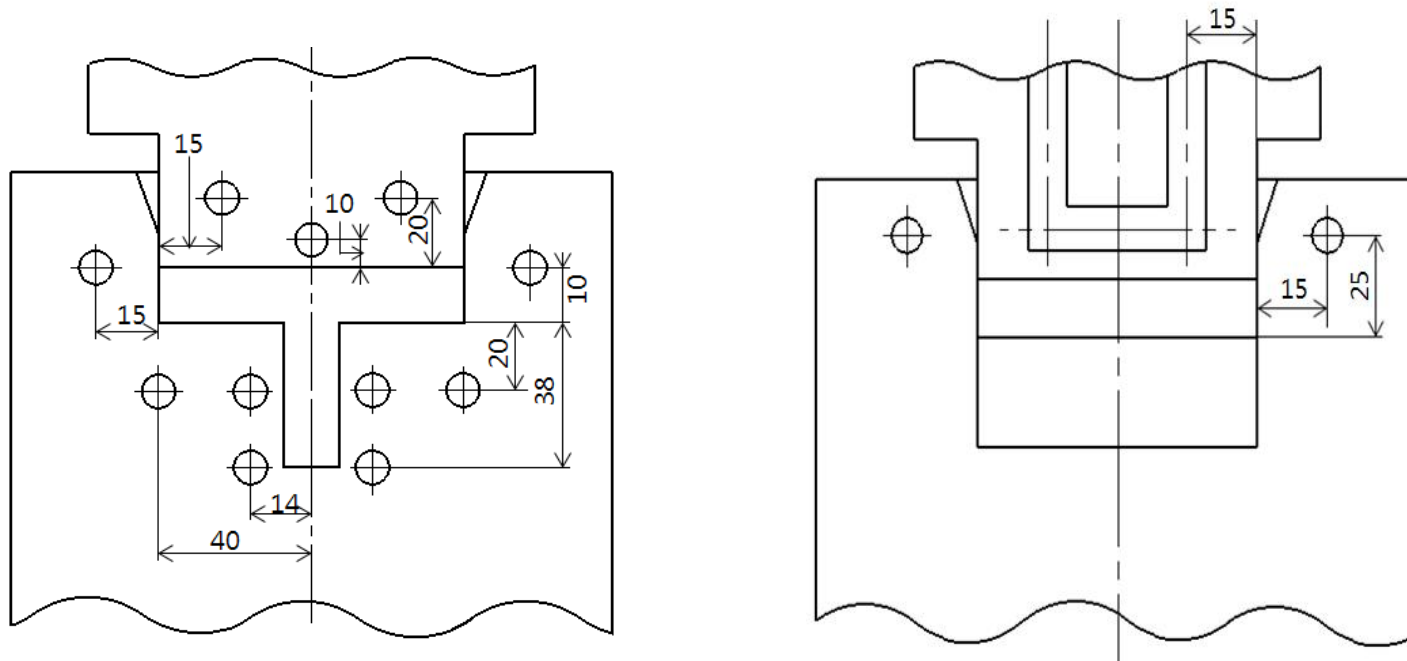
Location of the heating medium circulation holes($\phi 10$ mm) in mold
